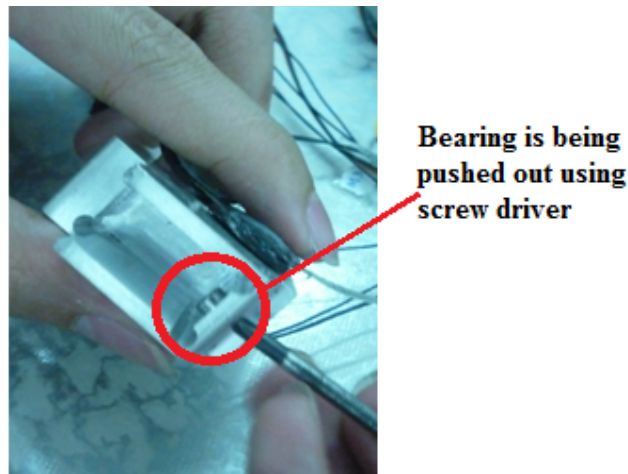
The bearing is pushed out with ease using a screw driver via base.
